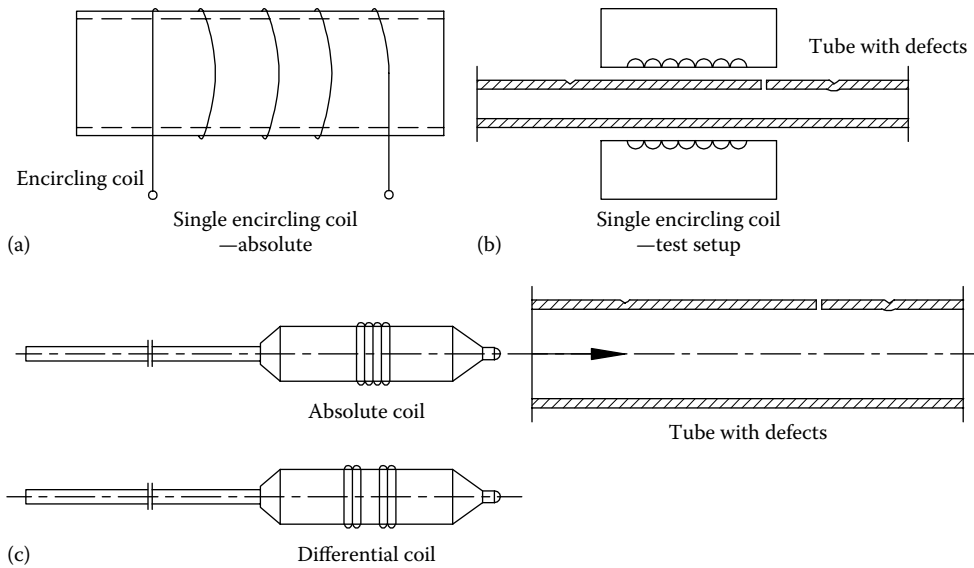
ET probes: (a) single coil encircling probes, (b) typical test setup with single coil probe, and (c) internal bobbin probes.
